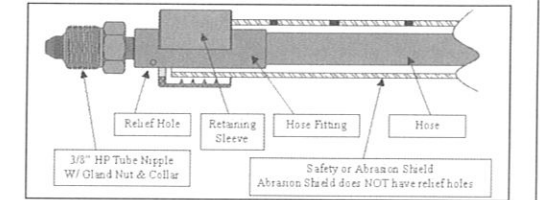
Basic design of a 40,000 psi hose assembly with safety or abrasion shield without stiffener. (Also, pictured on the cover.)
